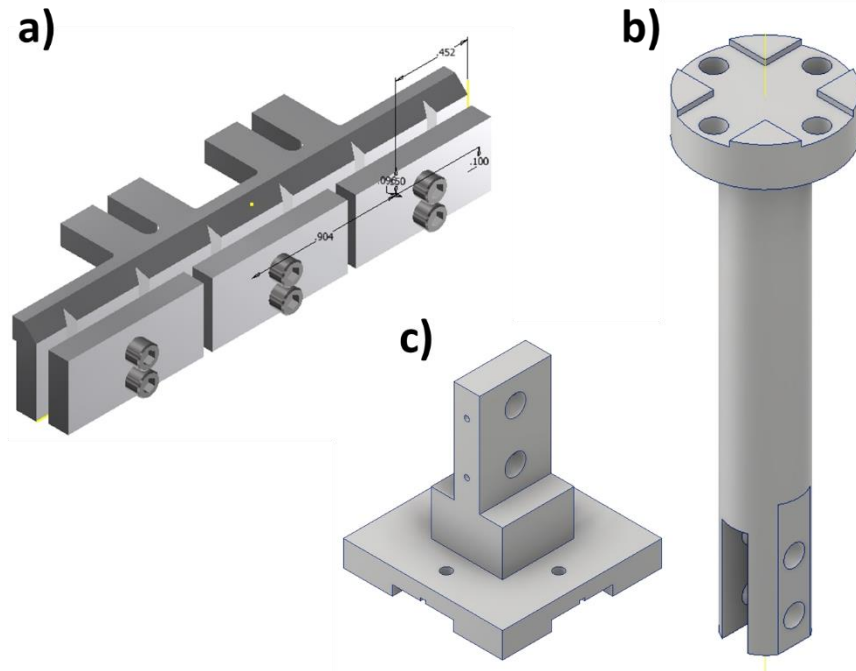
Technical drawings of fixture parts. a) Cable holder. b) Fixture extension. c) Fixture joint. Note that the sketches are not to the real scale.
